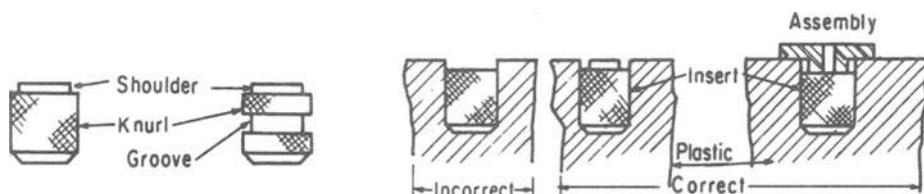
Knurls and grooves can serve to anchor inserts in molded products. They should be flush with the top surface or in contact with an assembling member to prevent their jacking out.
